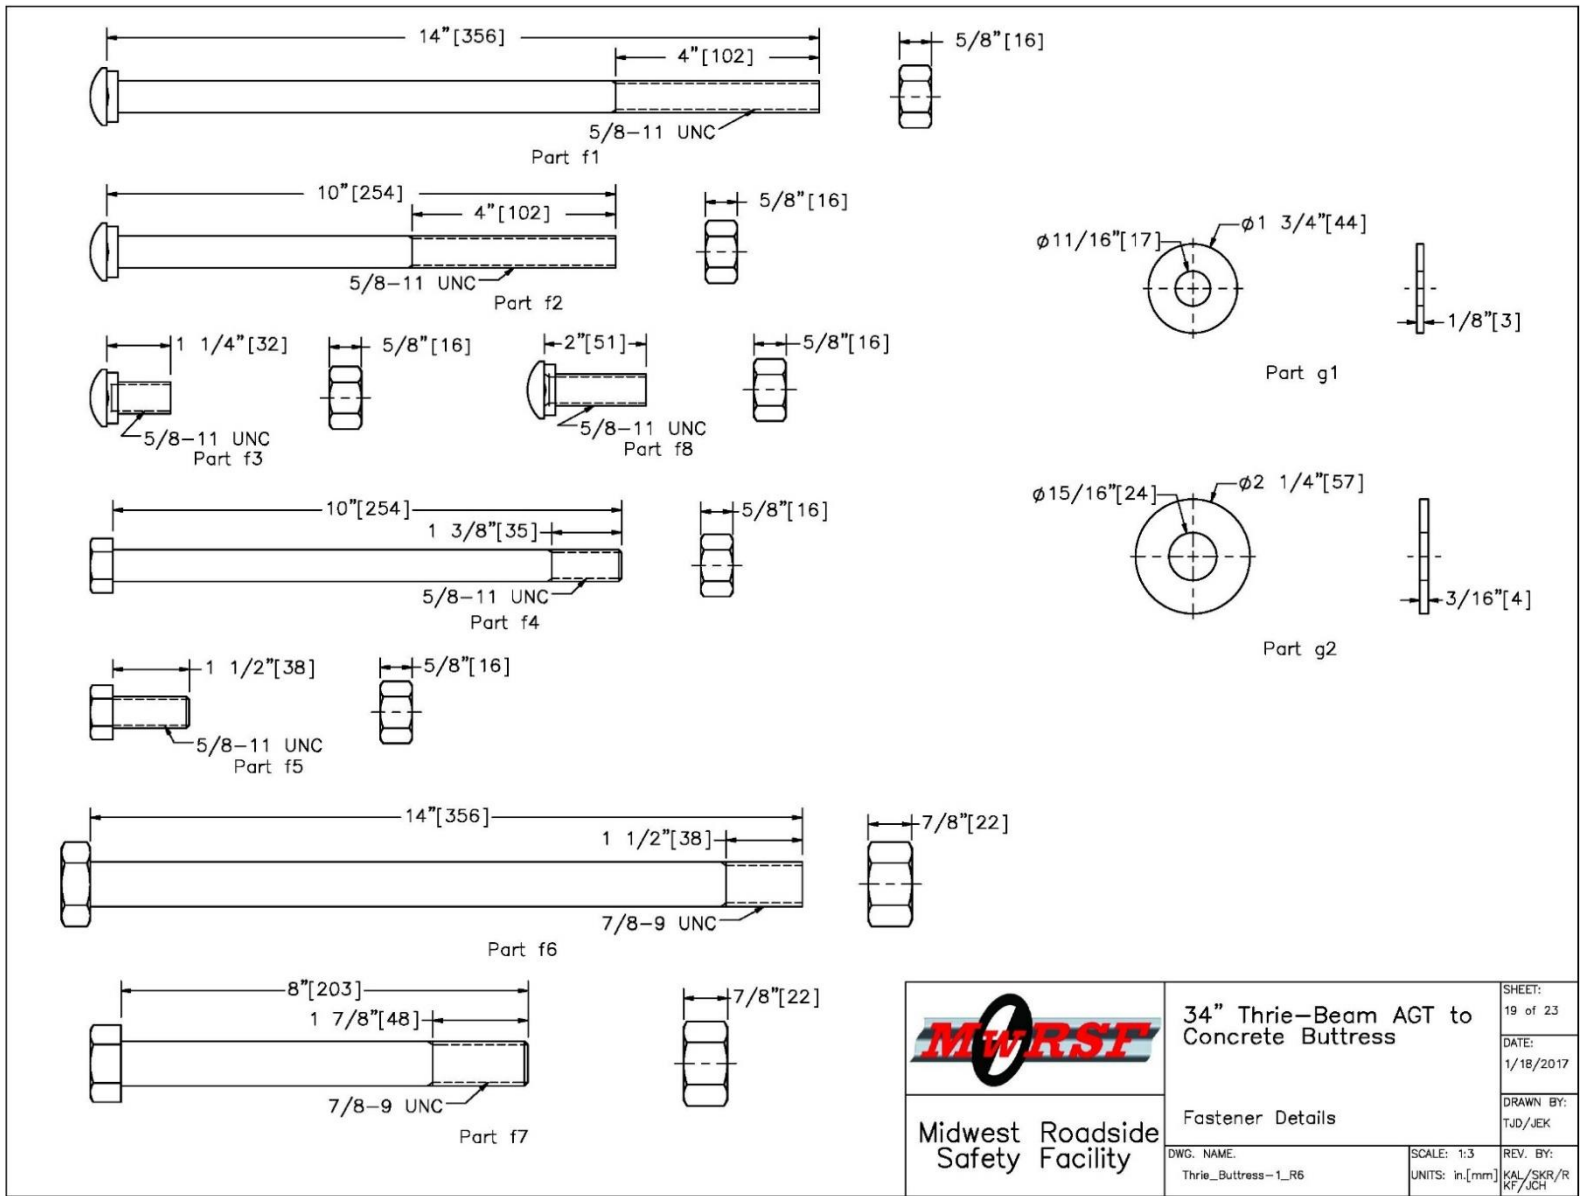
Fastener Details, Test Nos. 34AGT-1 and 34AGT-2
